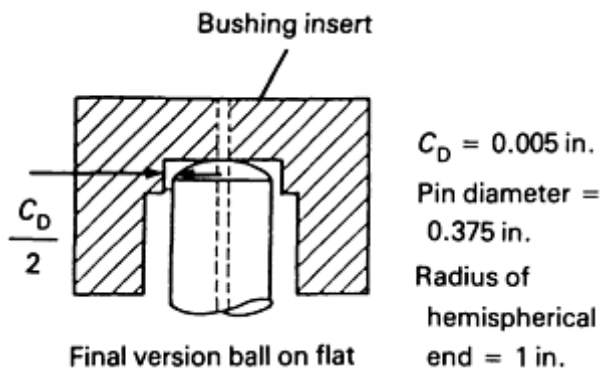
Bushing insert for pivoted-pad hydrostatic journal bearing. Source: Ref 21
